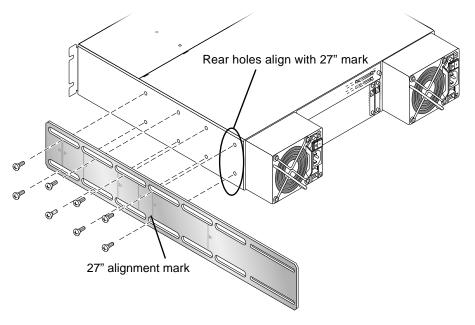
Aligning a Side Bracket With the Rear Threaded Holes on the Side of the Array
